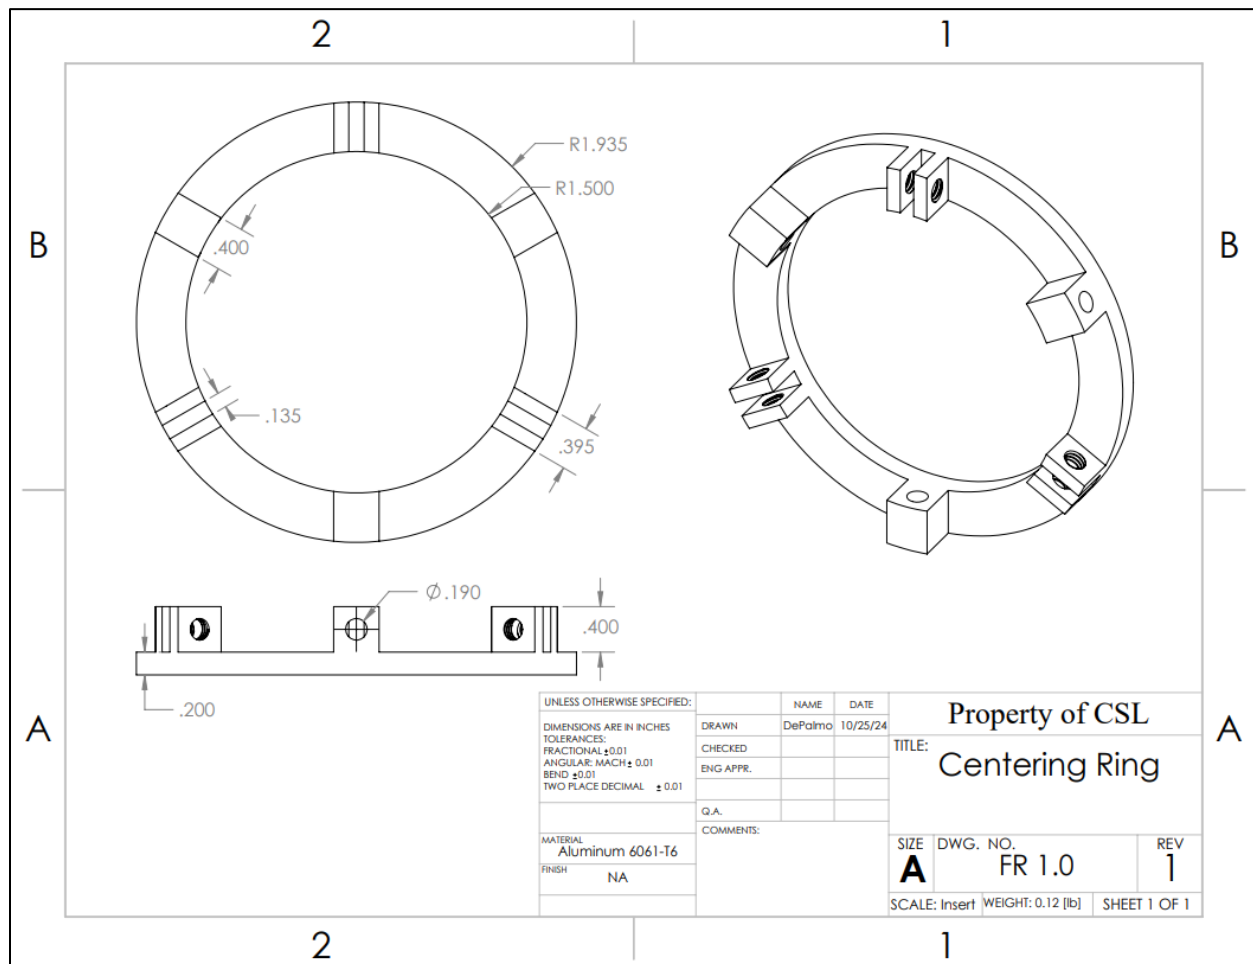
Dimensioned SolidWorks Drawing of Centering Ring.
